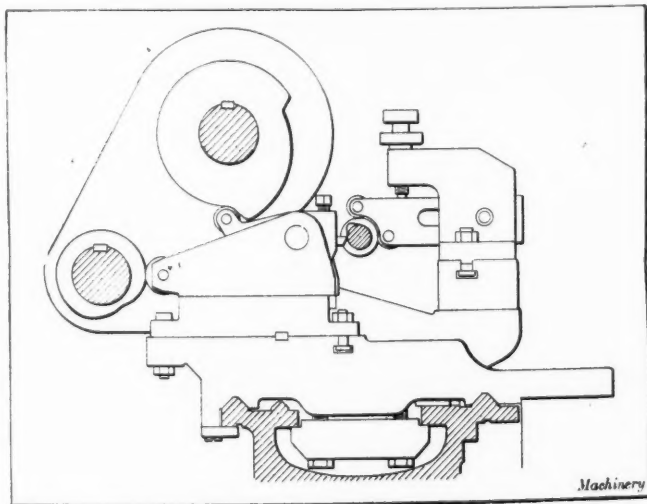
Cross-section of Lathe, Showing Cams that Maintain Constant Cutting Angle of Tool
